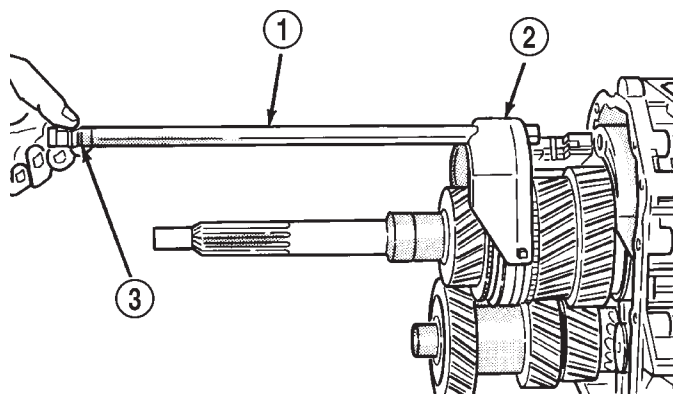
Removing Shift Shaft Lever And Bushing Roll Pin
